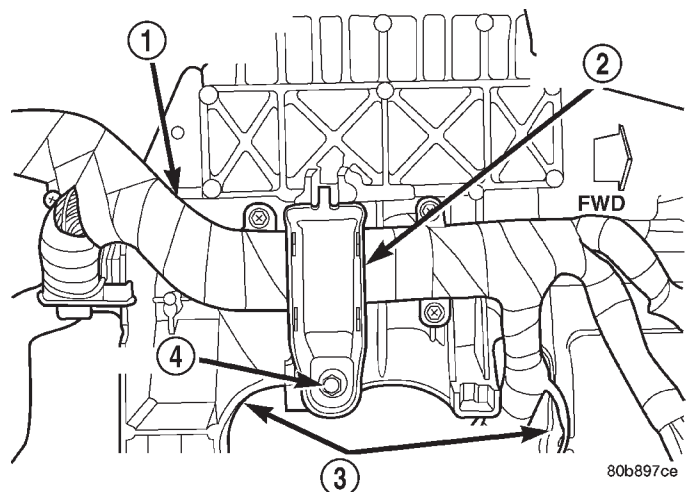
Instrument Panel Plenum Bracket Remove/Install
